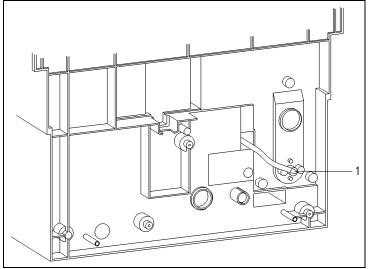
Underside View of the CVA 610 with Base Plate and Drip Tray Removed
